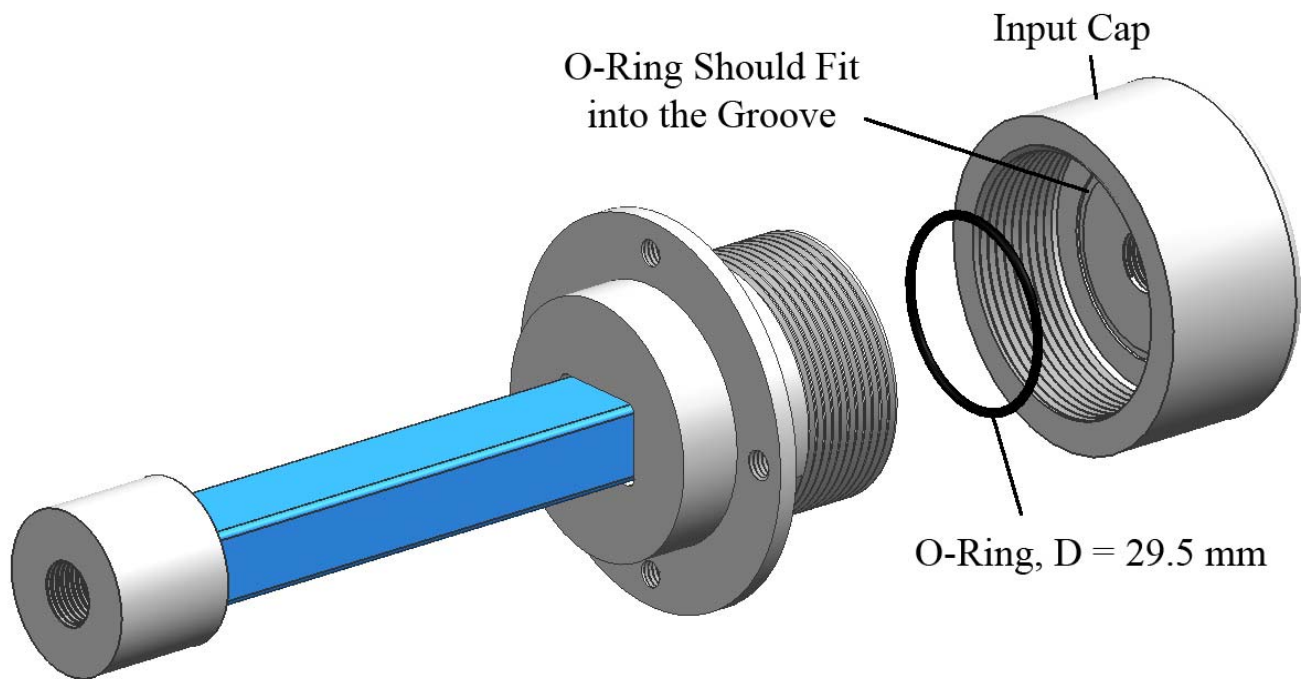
Finishing the Reaction Chamber Assembly by Sealing the Casing with the Cap and O-Ring
